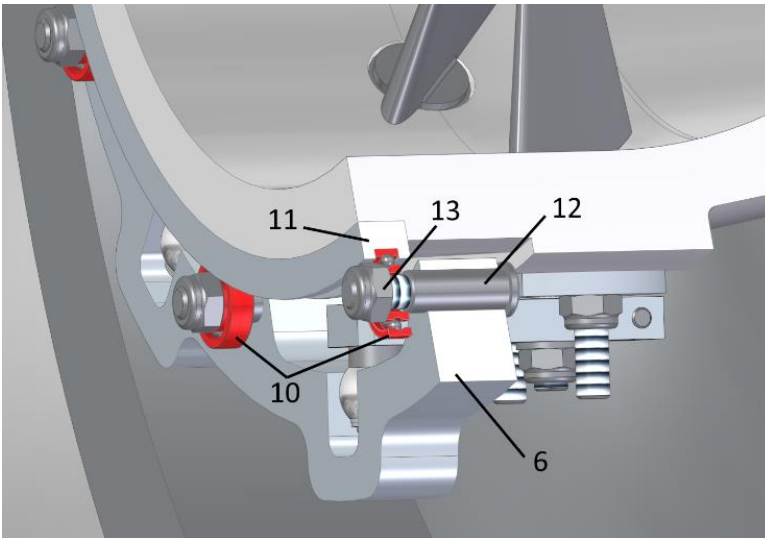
Section through the IGV adjustment mechanism, where: 6 – adjusting ring; 10 – bearings; 11 – locking ring; 12 – bolt; 13 – nut [image generated by the author]
